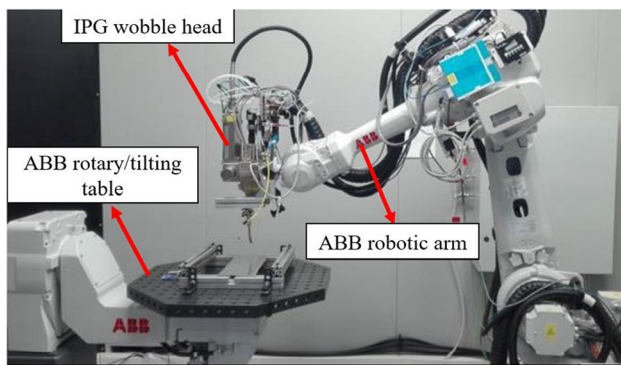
Robotic welding unit equipped with the wobbling head
